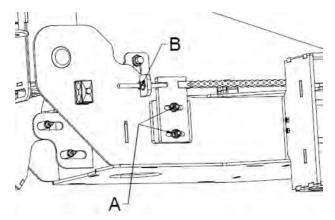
Adjusting the Shock Absorber Slide Chain Tension
